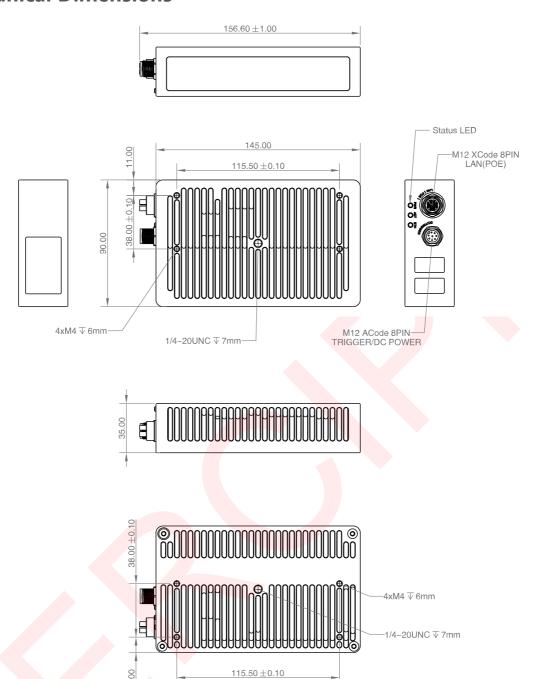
FM855-E1 Mechanical dimensions (unit: mm)
